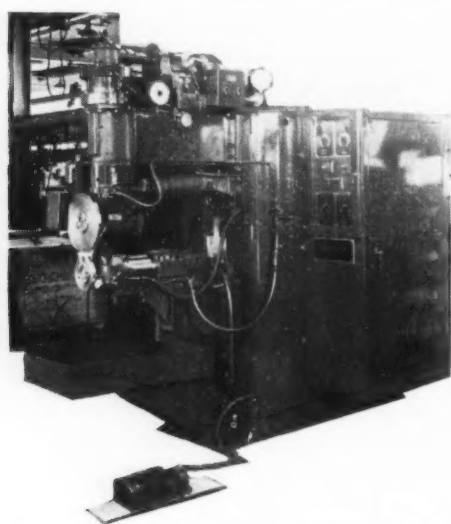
For seam welding stainless up to  $\frac{1}{8}$  in. thick, this 125 kva, three phase unit is employed. It has a 35 in. throat depth and 3500 lb electrode force. Photo courtesy Sciaky Bros., Inc.
